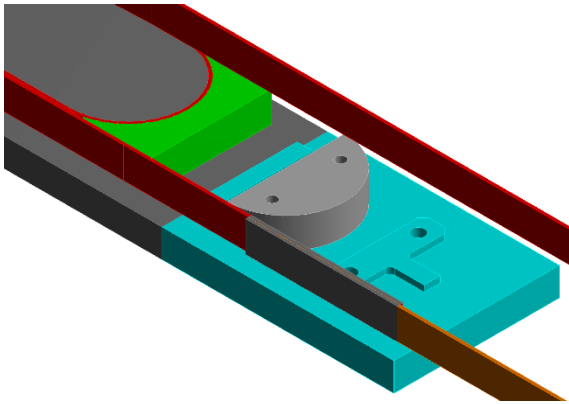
HF and LF cable sections are crimped with a thin point-welded foil.
